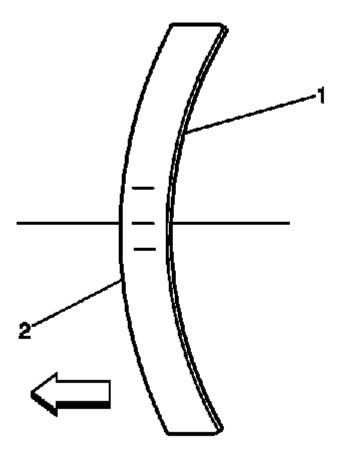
View Of Crown Of Crankshaft Balancer Washer Courtesy of GENERAL MOTORS CORP.
